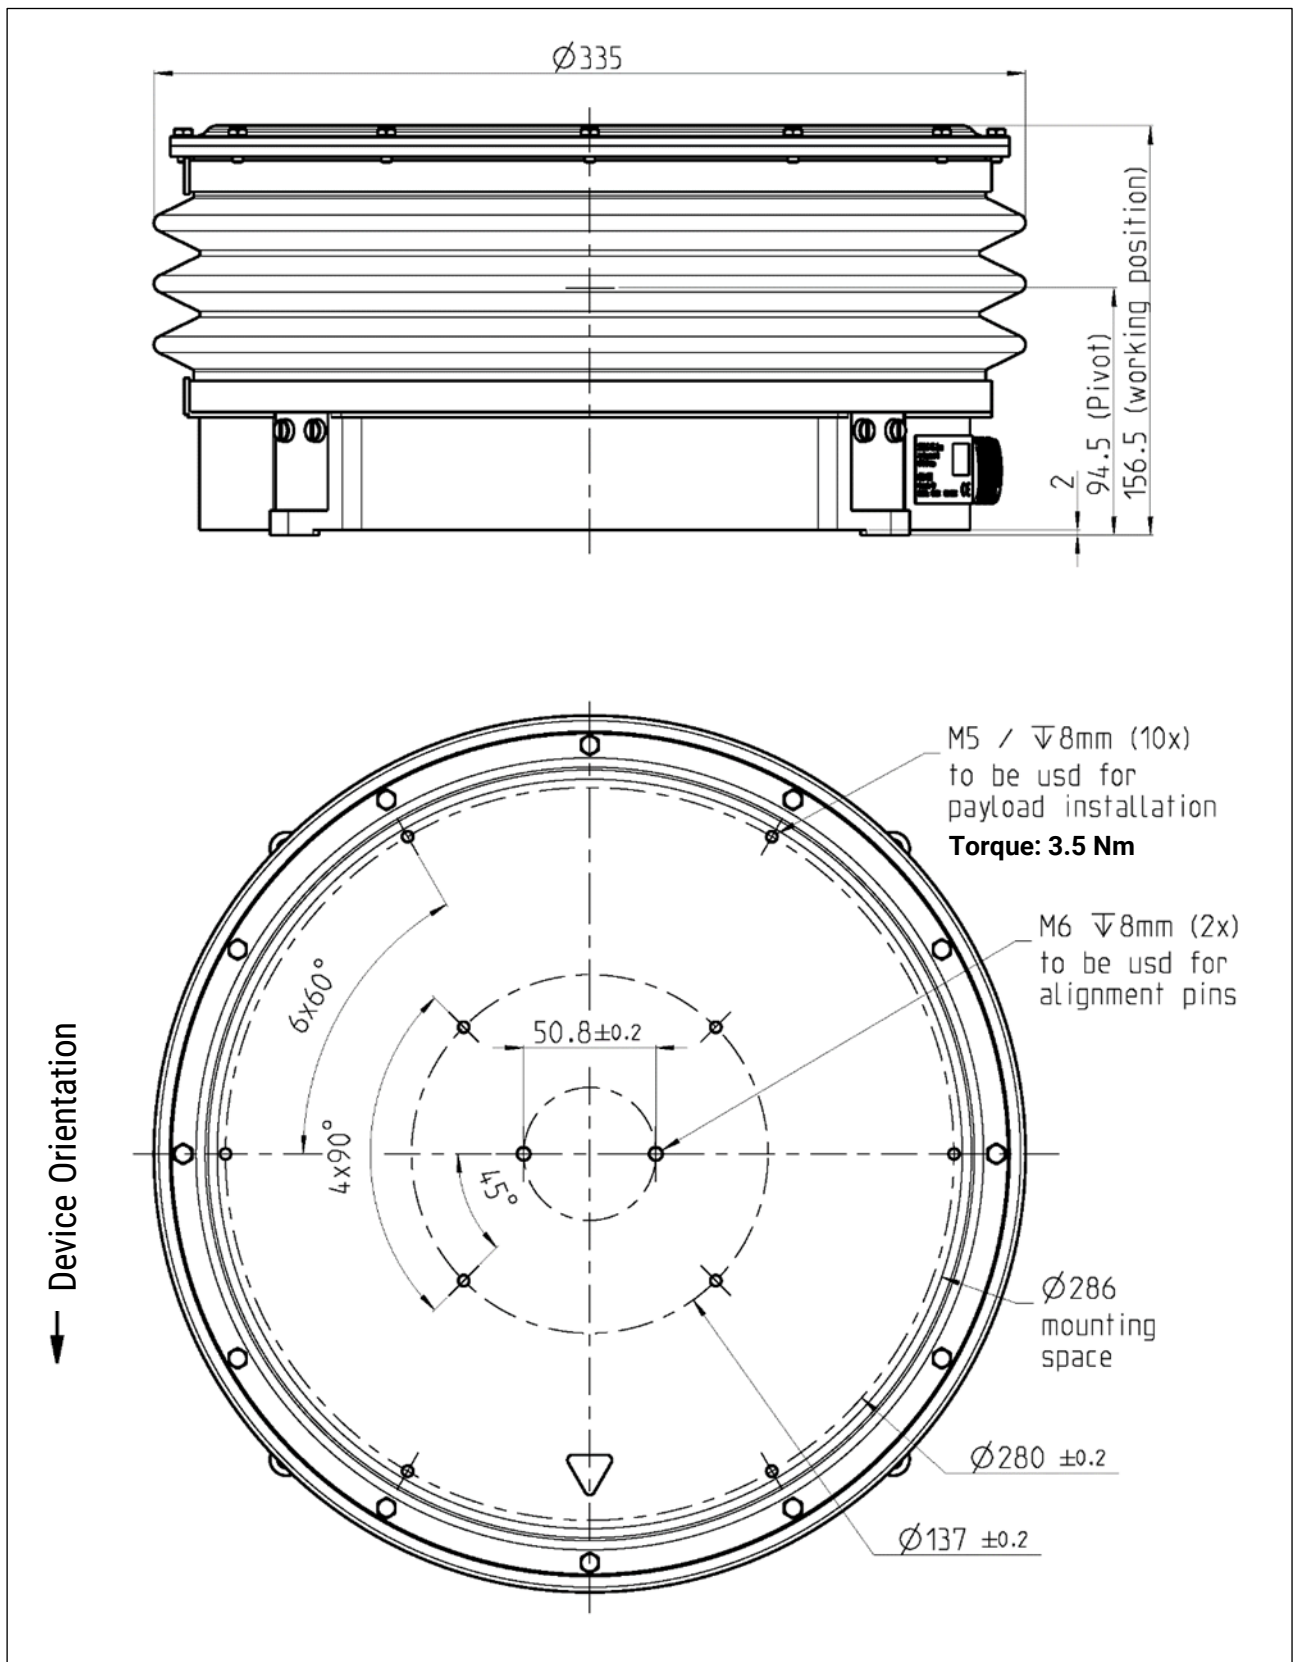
RSM 400 payload mounting holes, main dimensions and pivot
